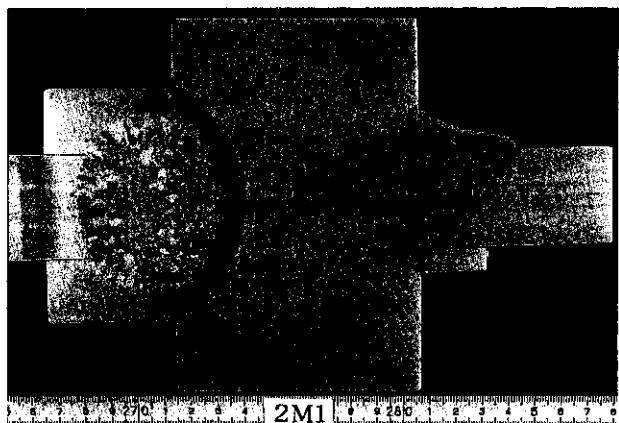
Electroslag weld + CO<sub>2</sub> gas metal arc weld (flat)Photo 3 Electroslag weld + CO<sub>2</sub> gas metal arc weld (horizontal)
